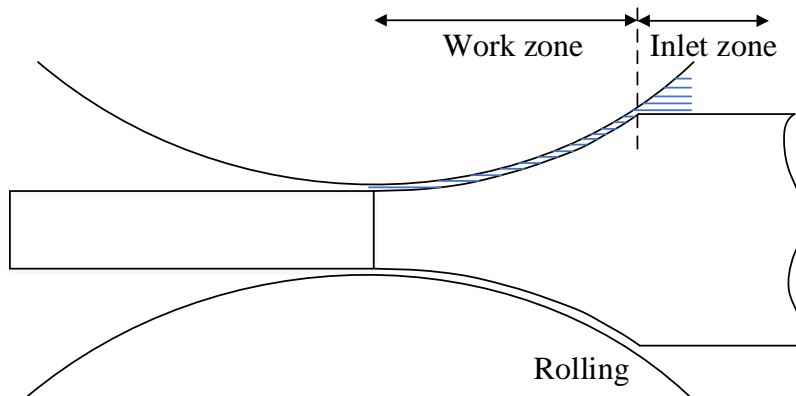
Schematic view of the inlet and work zone in the lubricated strip rolling process
